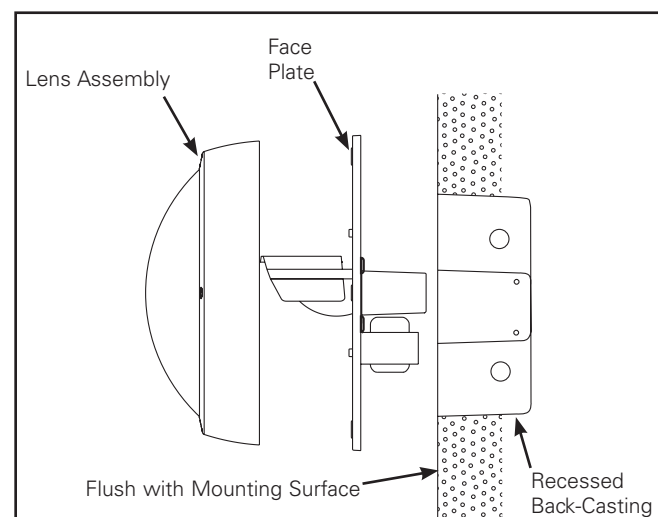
Lens / Face Plate Assembly Terrapin™ Series
